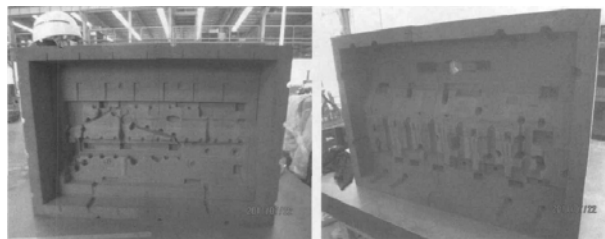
Engine block mold by laser sintering, left is drag and right is cope
